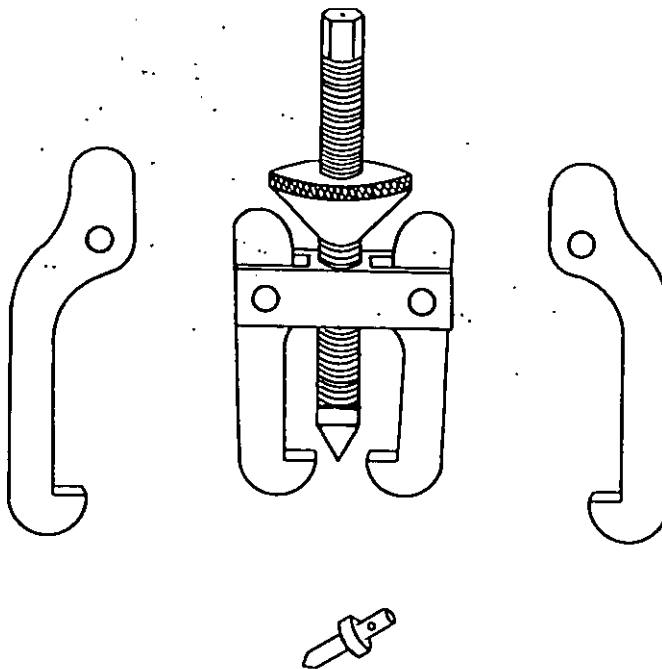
Type I, class 6, puller, mechanical, gear and bearing, two-jaw, light-duty, external.
